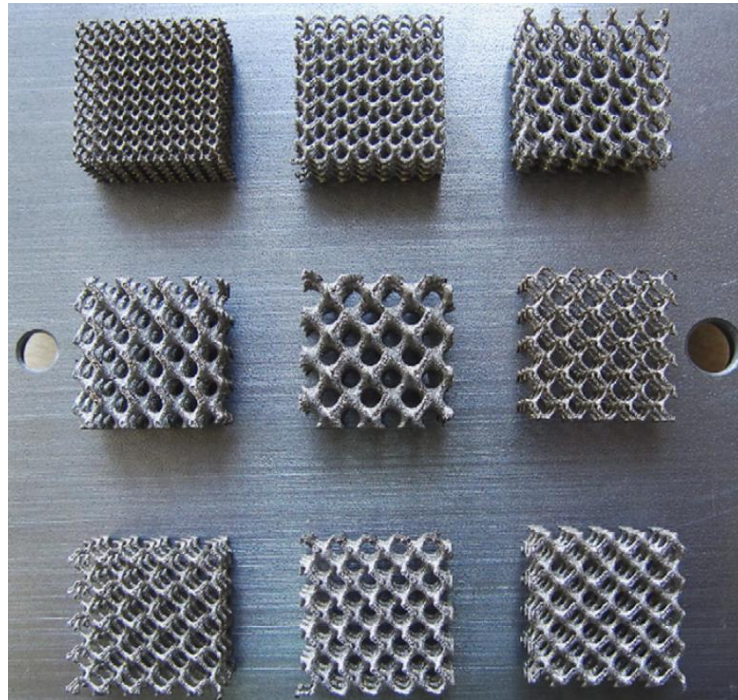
Metal foam fabricated by the SLM technique [25]
